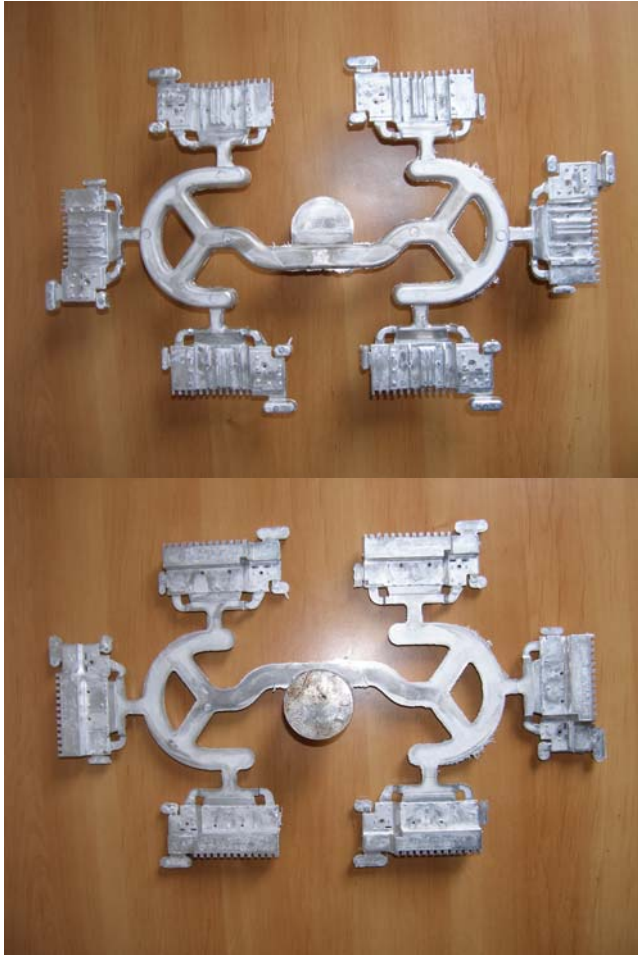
Macrographs of AZ91 magnesium alloy radiators fabricated on the Polak cold-chamber die-casting machine with 250 tons locking force in the "SILUM" Foundry
